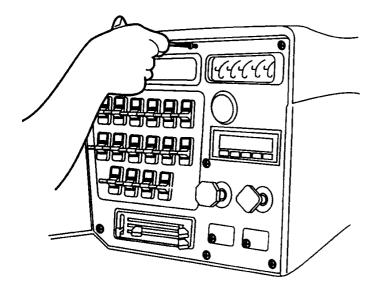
Dash Cover Panel Remove/Install (92/93/94/9900 Models)
